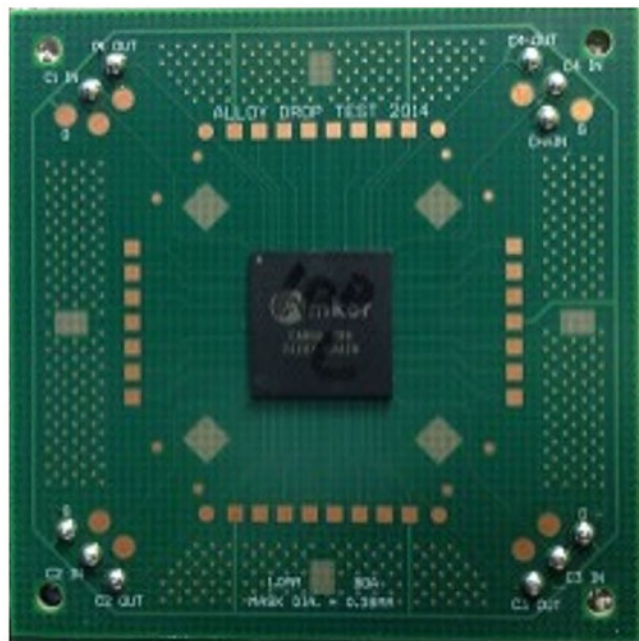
Assembled test board (77 mm x 77 mm) with two monitor channels (input, output) accessible at each corner.
